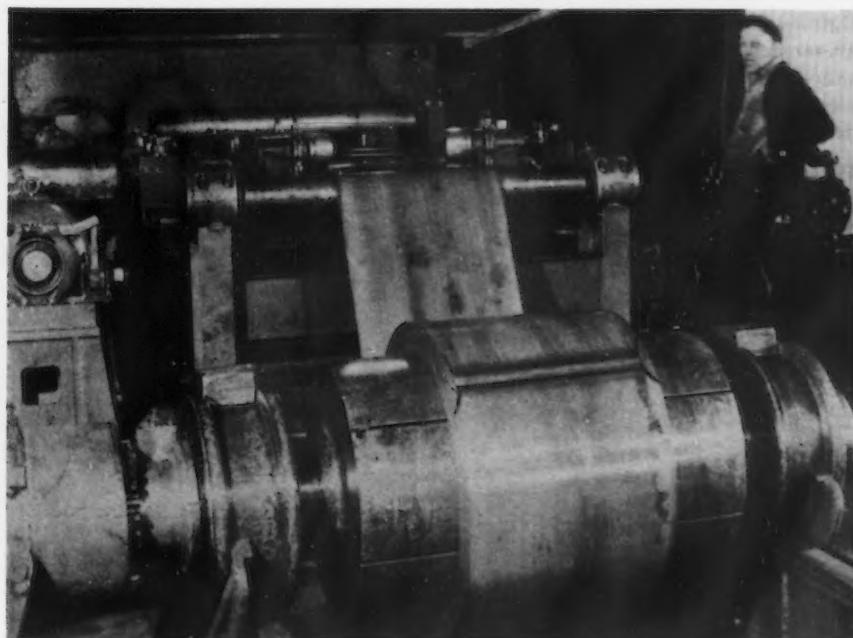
After welding, the entire coil (two hot coils) is rewound on this mandrel, after which the strip is passed through a 48-in. reversing cold mill. Note the side clipped traverse weld in the foreground.
